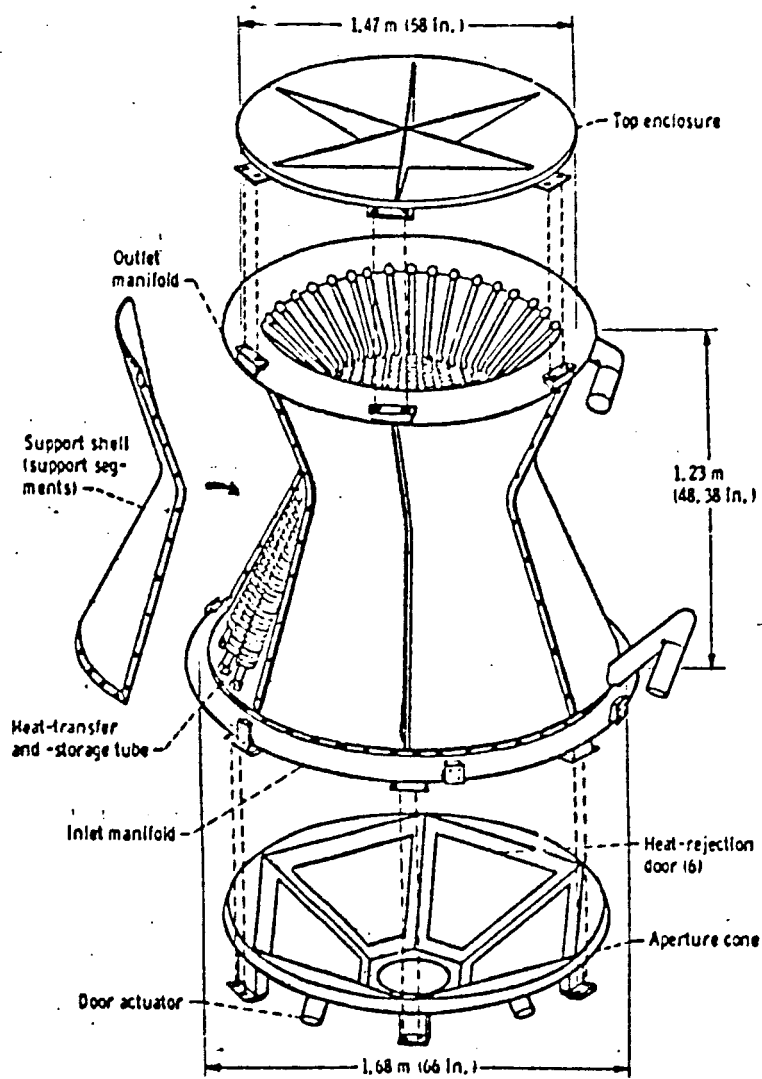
EXPLODED VIEW OF A BRAYTON RECEIVER [1]
